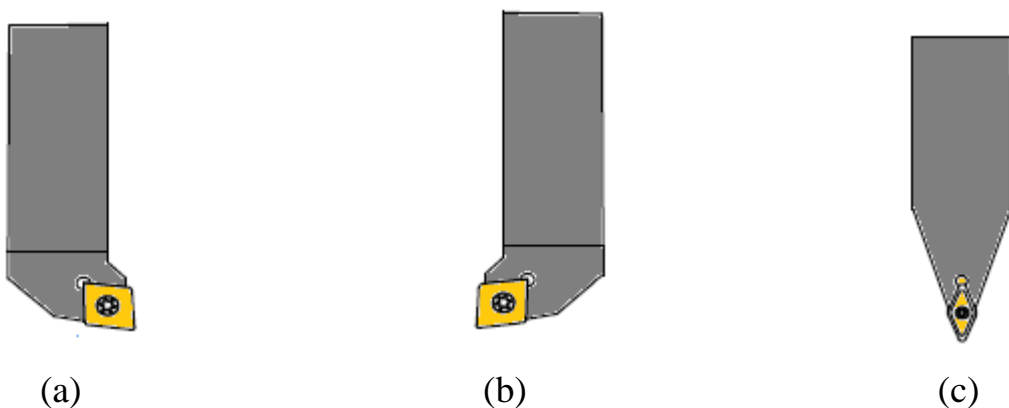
(a) Straight carbide insert tool R; (b) Left carbide insert tool L; (c) Neutral carbide insert tool.
